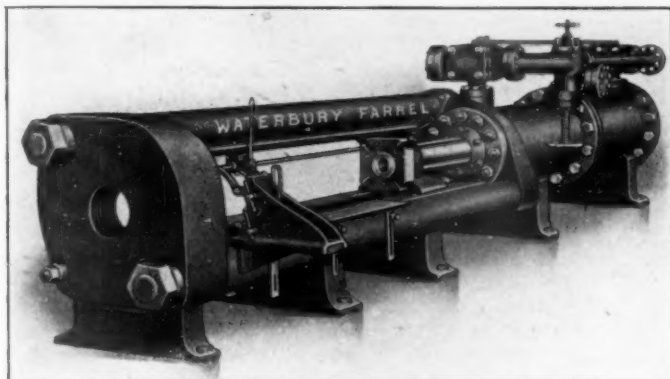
REDRAWING SEAMLESS TUBE BENCH. MADE BY WATERBURY-FARREL FOUNDRY AND MACHINE COMPANY, WATERBURY, CONN.
